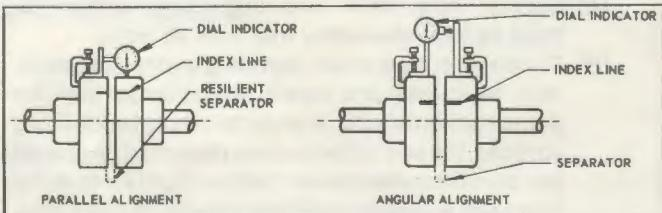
TESTING ALIGNMENT, DIAL INDICATOR
